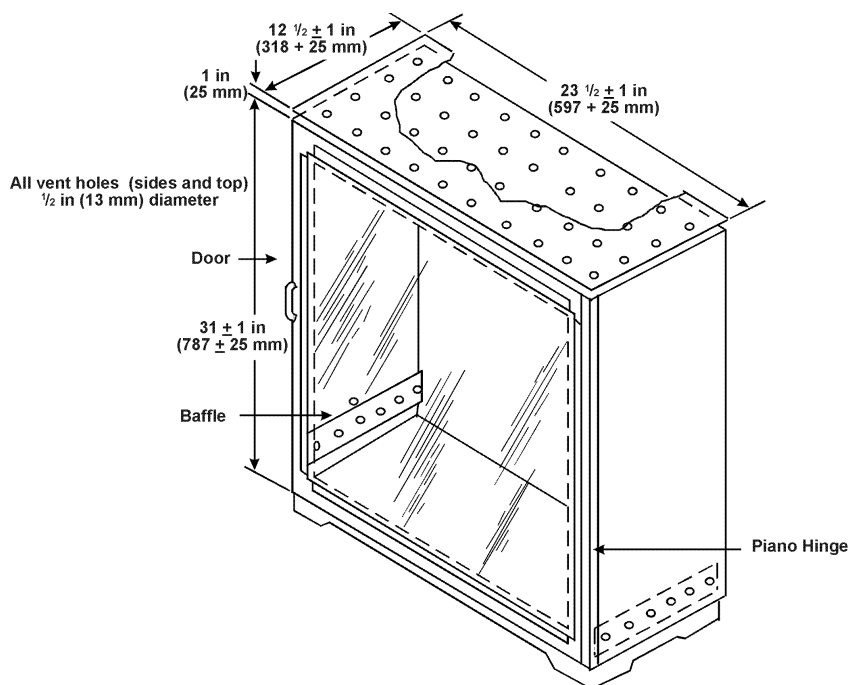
Sketch of Horizontal Bunsen Burner Test Cabinet
